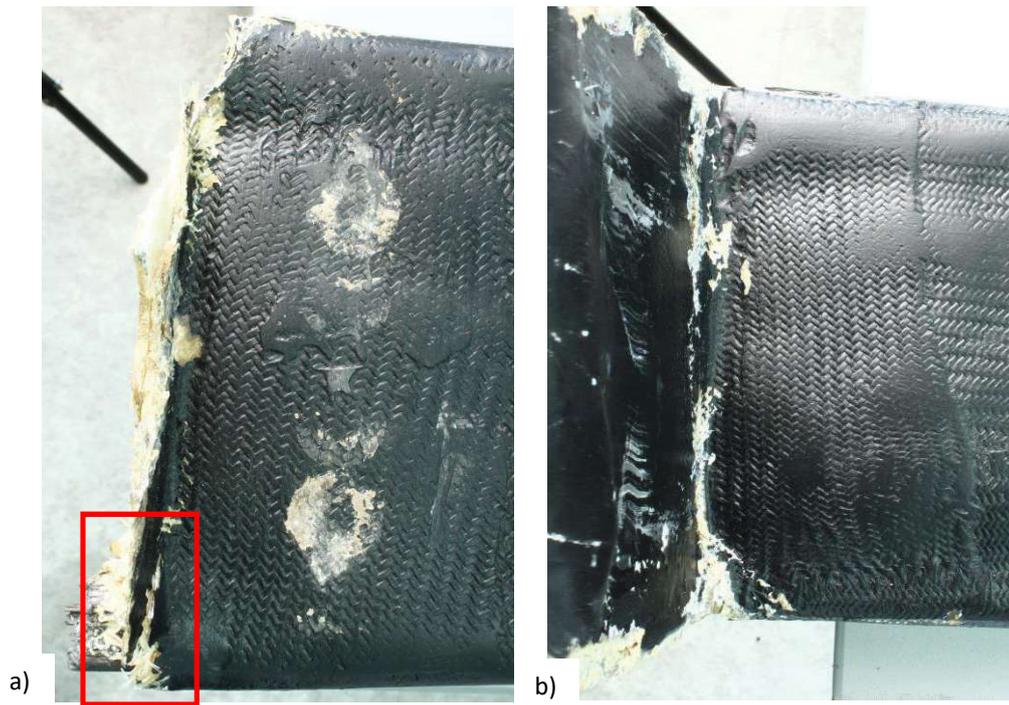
Overview image of a) the rear side of the spar, showing the tear in the fabric caused by the fracture of the lower flange, and b) the front side of the spar. The upper flange is always pictured on top.
